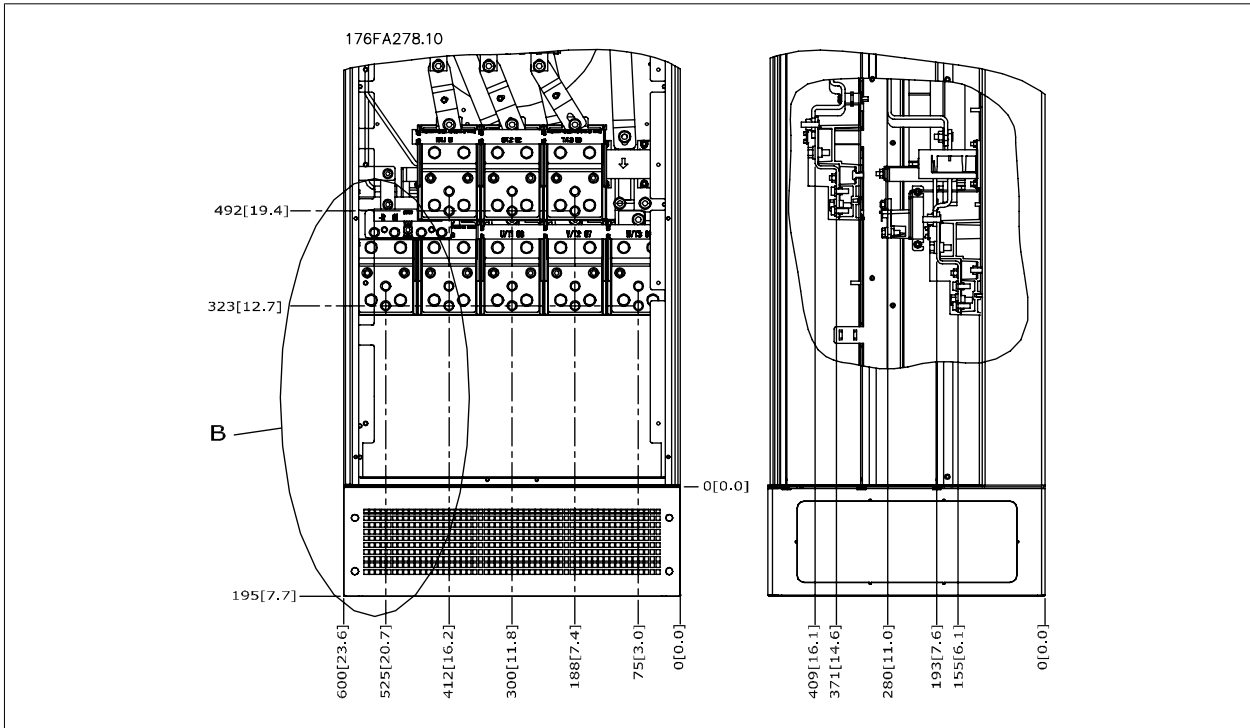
IP21 (NEMA Type 1) and IP54 (NEMA Type 12) drive type power connection positions
